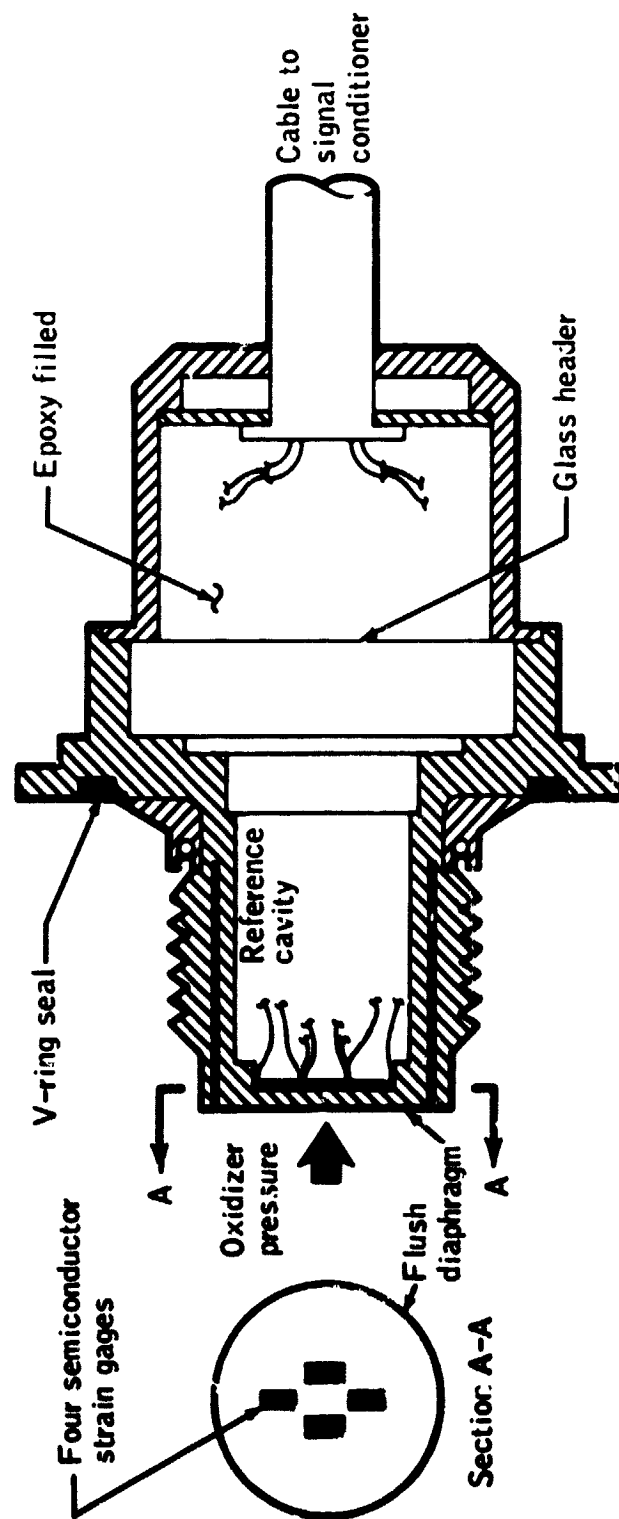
Cutaway view of oxidizer pressure transducer.
